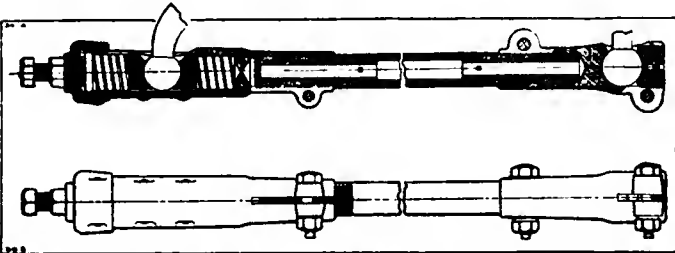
Section and plan of drag-rod, and manner of placing bumper spring.
